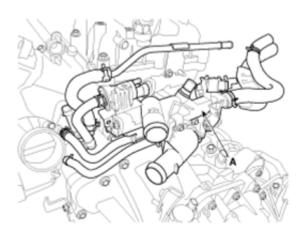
Identifying Water Temperature Control Assembly Courtesy of KIA MOTORS AMERICA, INC.
